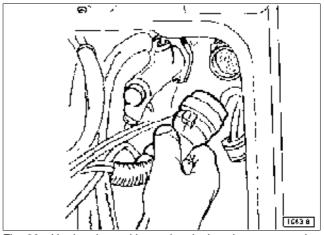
Unplug the multiway electrical socket connected to the front of the cab on the left hand side.
